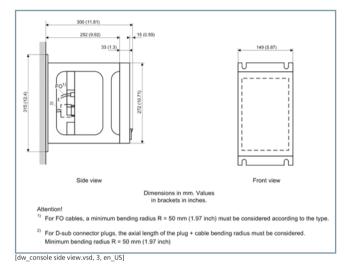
/21 Non-Modular Surface-Mounted Device with Integrated On-Site Operation Panel, Dimensions from the Side and Front Views
